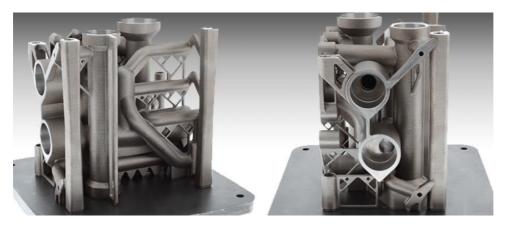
Complexed 3D printed engine component by Renishaw [6]
